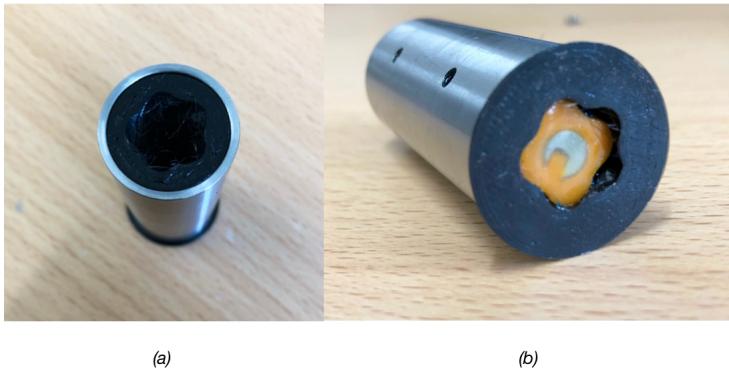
(a) Steel sleeve with stator inside. (b) Rotor and stator working together. Notice the steel core inside the rotor.
